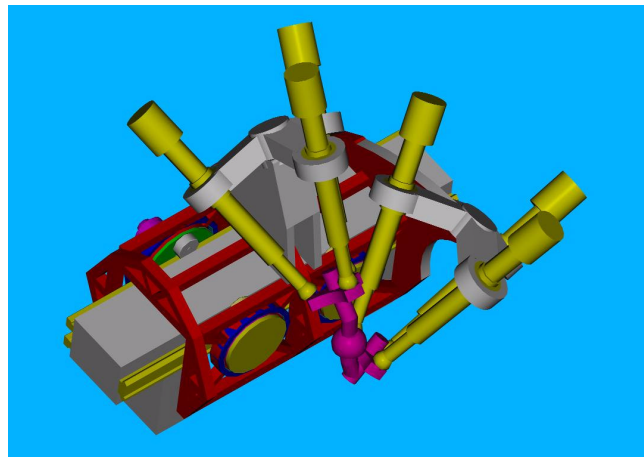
Intersector Welding Robot, mounted on rail with 6 rams.
